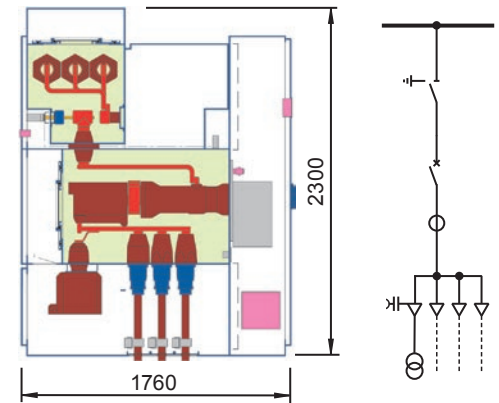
Feeder panel 2000 A with current and voltage transformer and three cables per phase
